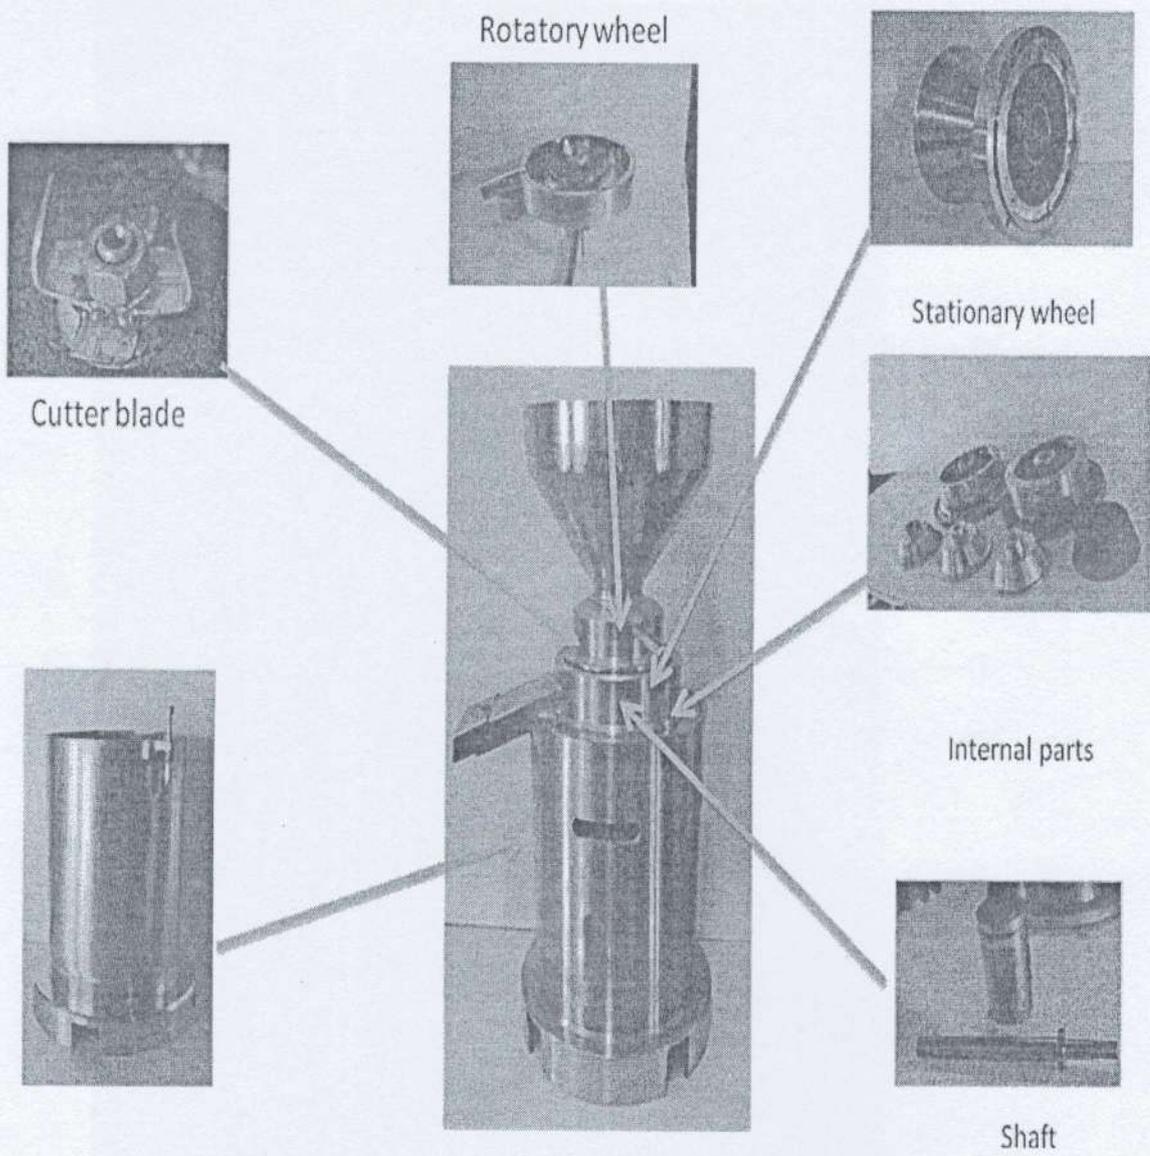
Various parts of continuous improved wet cum dry grinder.
